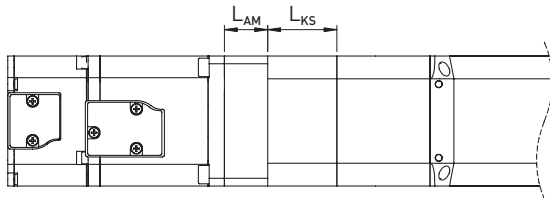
Motor connection of linear modules HM-S without belt drive
